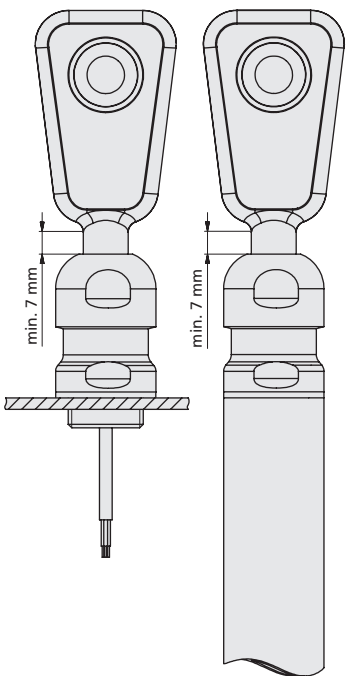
pms sensor D12 adapter shaft with sensor screw connection BF-pms/A1 mounted to machine part or to stainless steel tube D26.8 with internal thread M20x1.5
